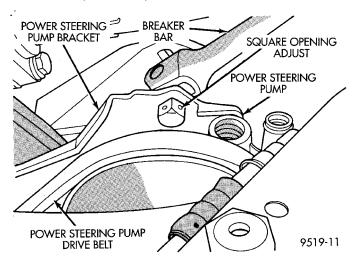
Setting Power Steering Pump Drive Belt Tension
